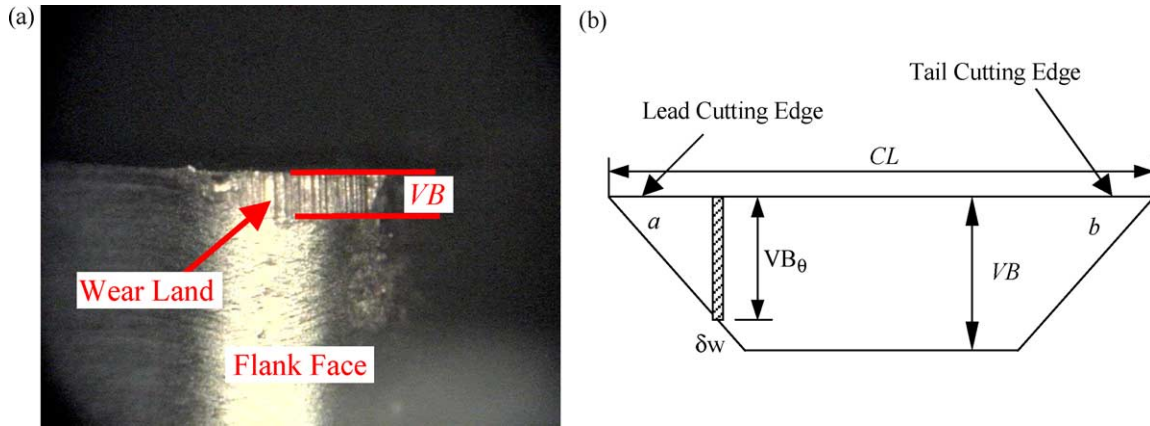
(a) Optical micrograph of flank wear-land of a worn tool and (b) flat depiction of flank wear-land.
